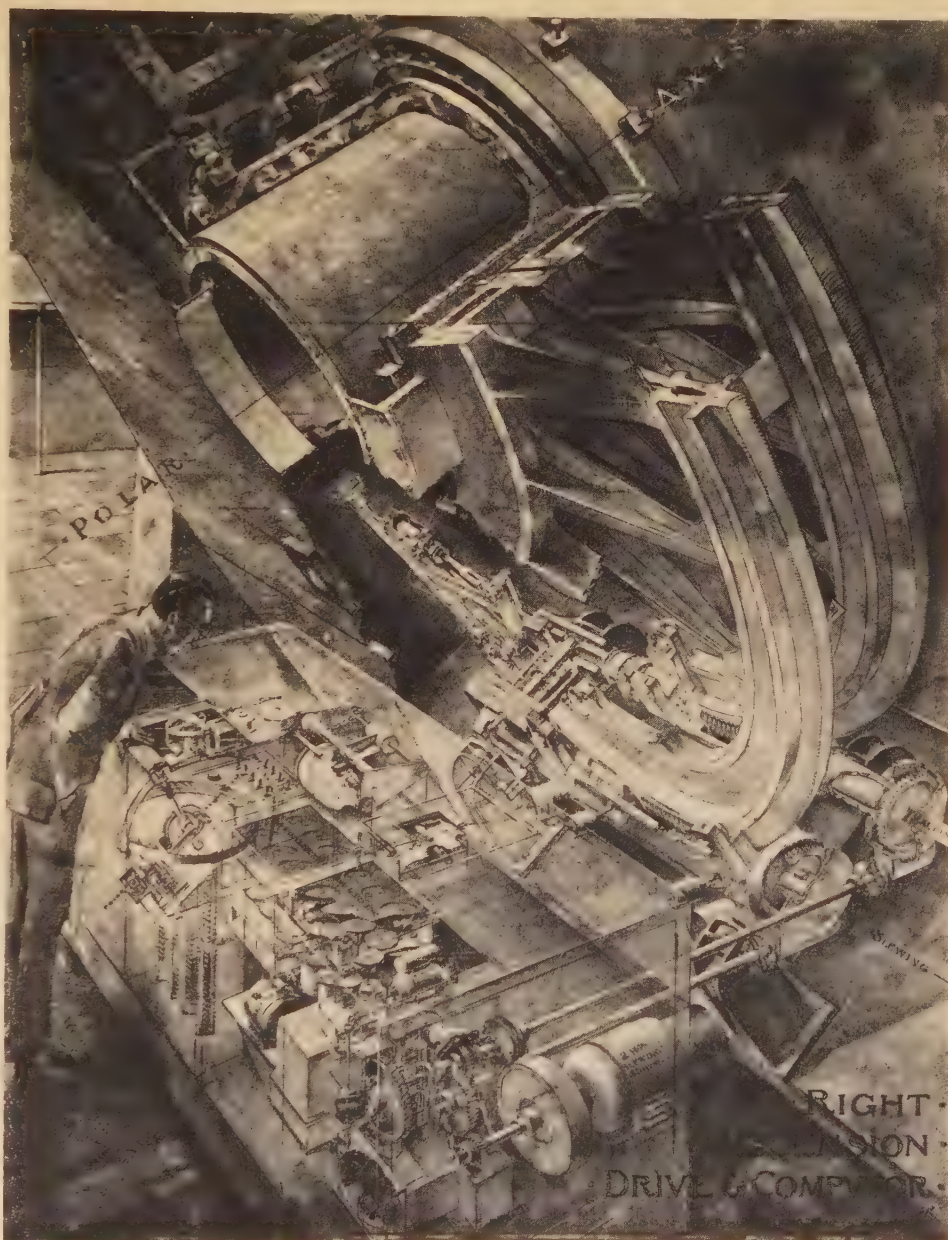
Right-ascension drive and computer mechanism with cutaway view of gears above
